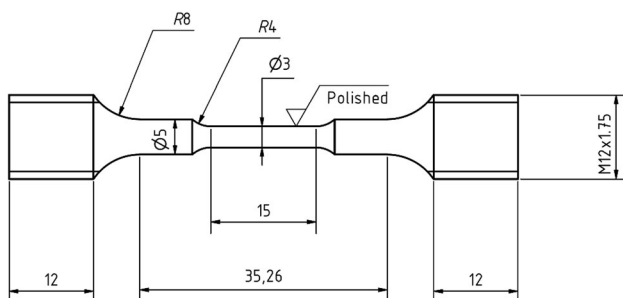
Technical drawing of tensile test specimen geometry with M12 thread (Unit: mm)
